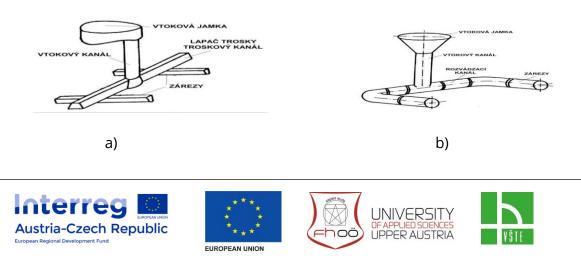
Gating system a) for casting cast iron b) for casting steel
